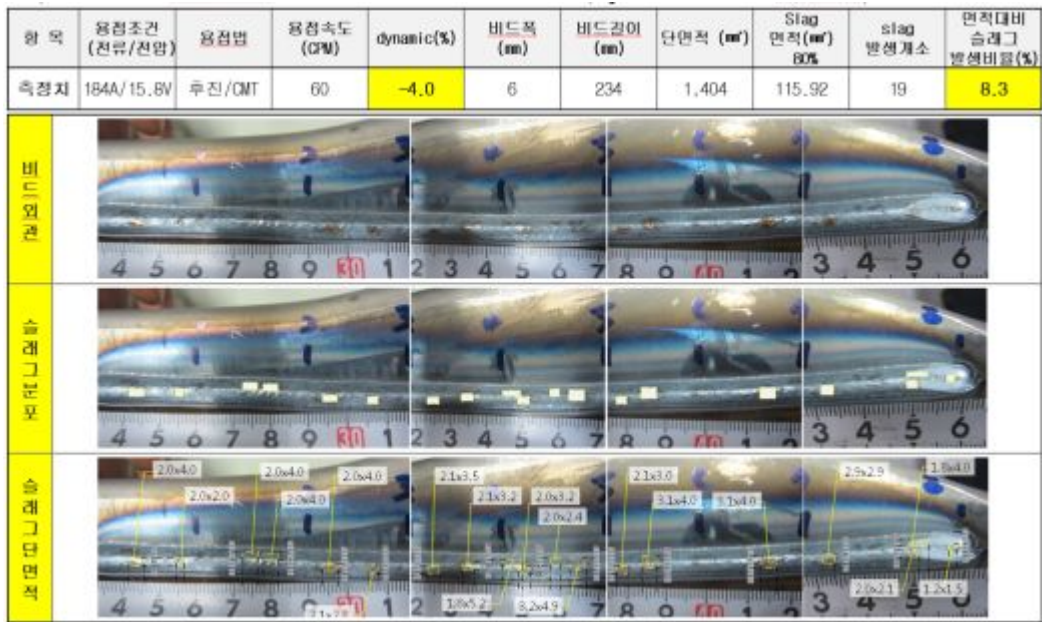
Dynamic-4.0%, Back step welding
